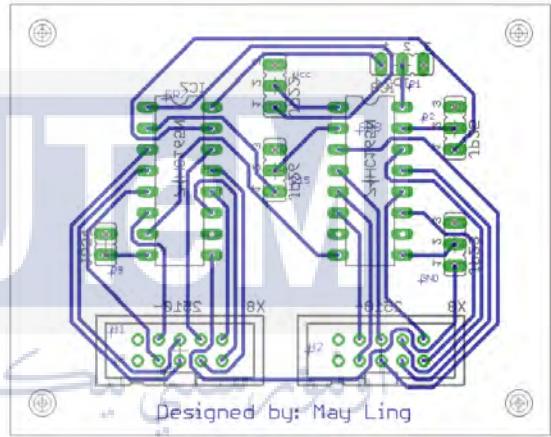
PCB Layout of 7th and 8th Shift Registers – SR7 & SR8
